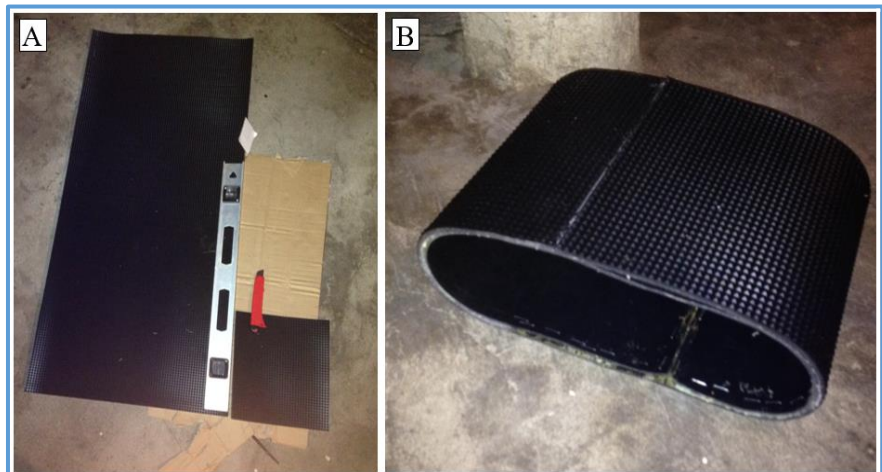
A) Cutting out rubber, B) Single tread bonded together
